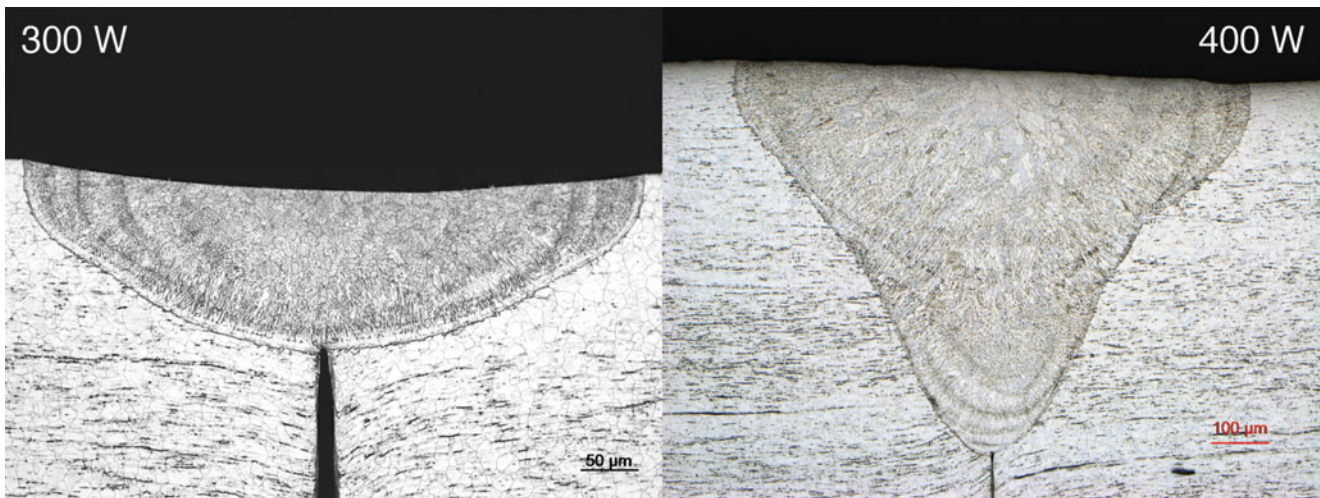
Metallography of weld bead on 304L stainless steel sheets for power levels of 300 and 400 W
